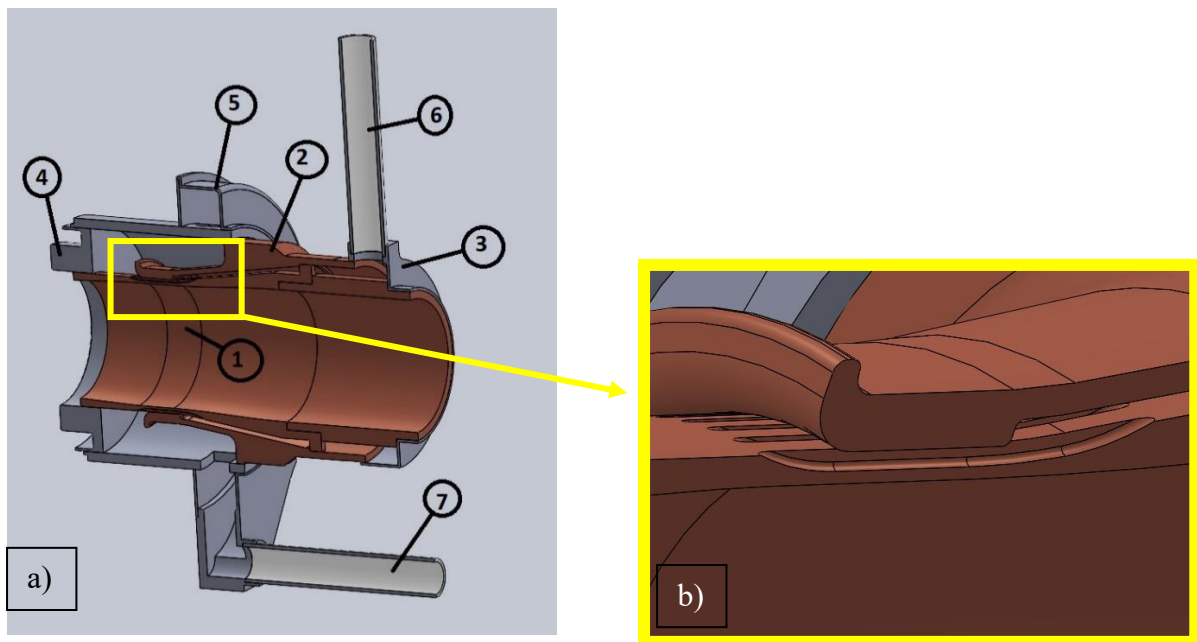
a) Section of mock-up used in hydraulic model, grey colour refers to stainless steel and red to copper. 1 – Resonator, 2- Water Stopper, 3 – Front Insert, 4 – Back Insert, 5 – Fluid Discharger, 6 – Fluid inlet tube, 7 – Fluid outlet tube. b) Zoom-in mini channels
